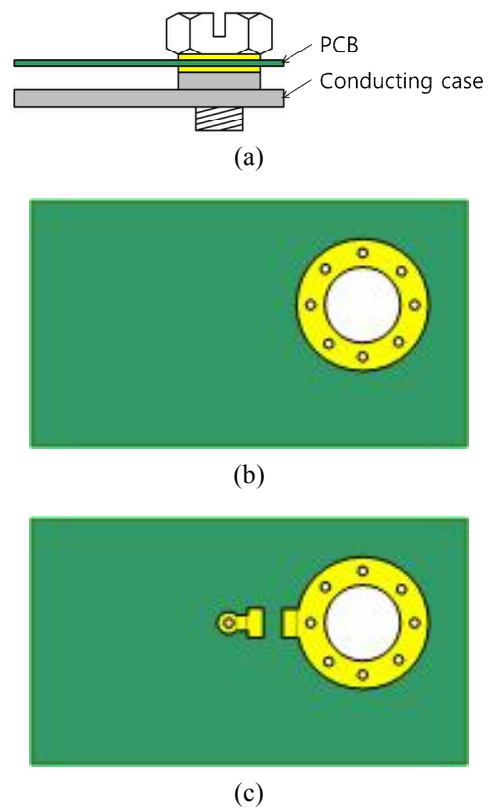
Geometry of grounding pad on a PCB: (a) Side view of a simple ground pad bolt-connected between a PCB and PEC plate; (b) Top view of a simple ground pad; (c) multi-purpose grounding pad
